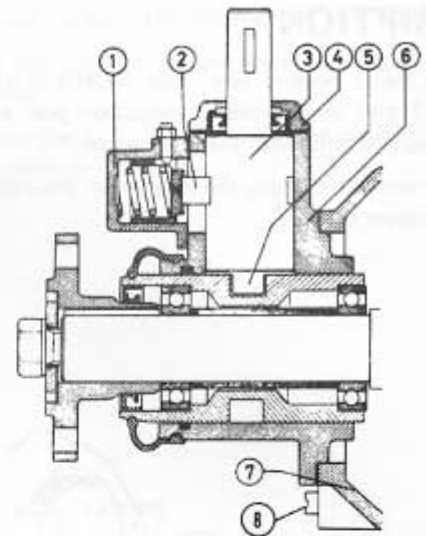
Rear section of reverse gear RB (manoeuvring mechanism)
